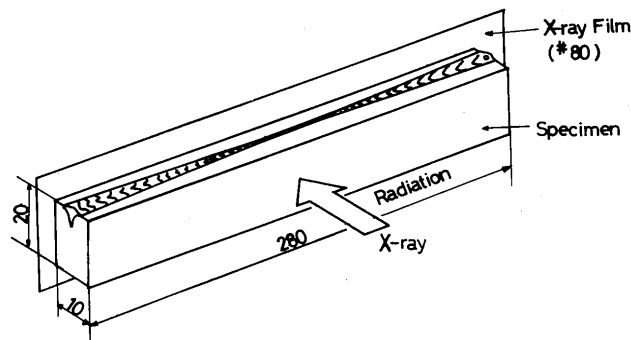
Bead-on-plate Welding Method by Slope Welding
